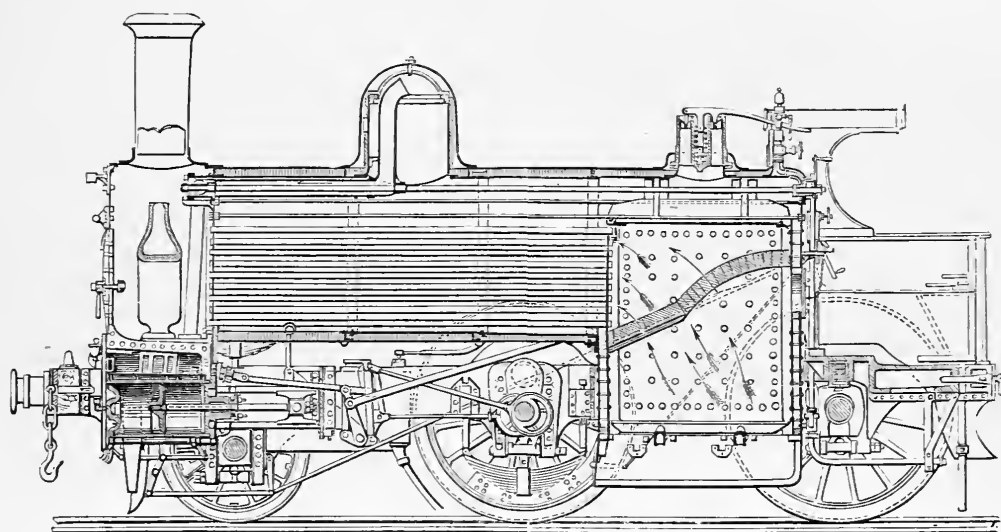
SECTION OF A LOCOMOTIVE STEAM-ENGINE.
